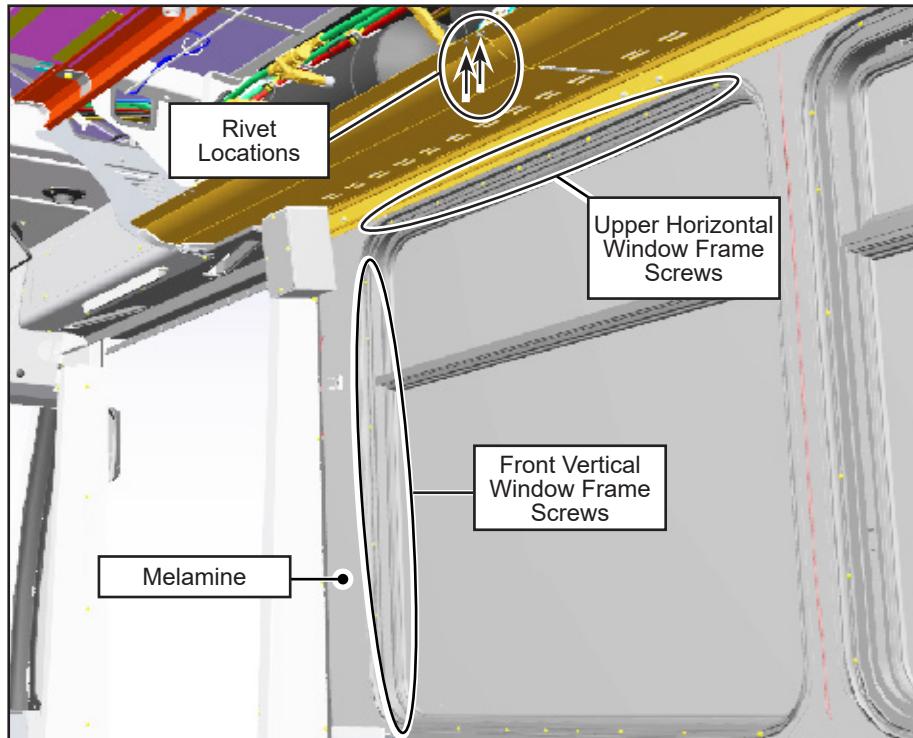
Drill Out the Two Rivets and Remove Window Frame Screws
